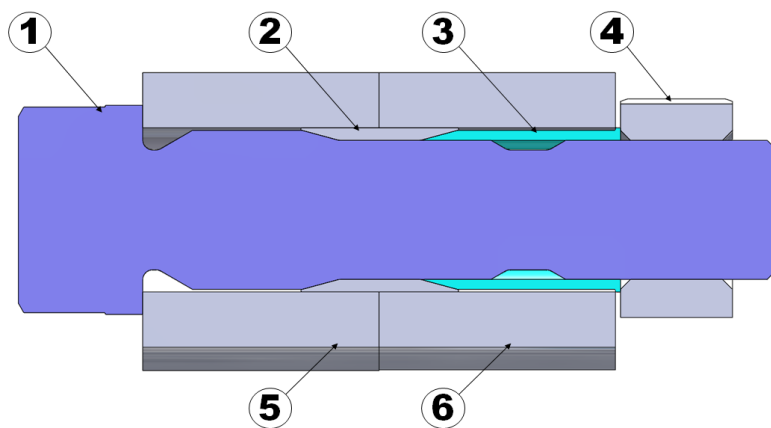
A 3D model of the DEFEX Assembly cut section
